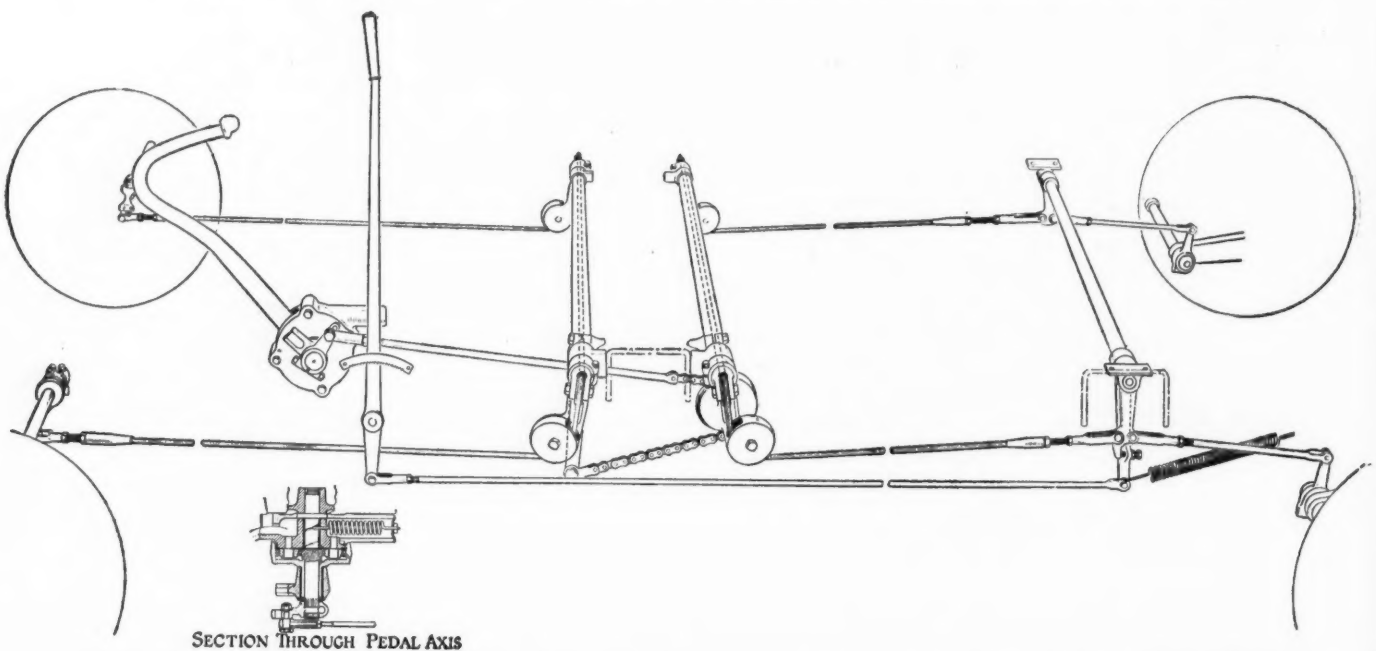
Arrangement of brake operating mechanism on new Packard eight-in-line chassis. A planetary gear is used on brake pedal
